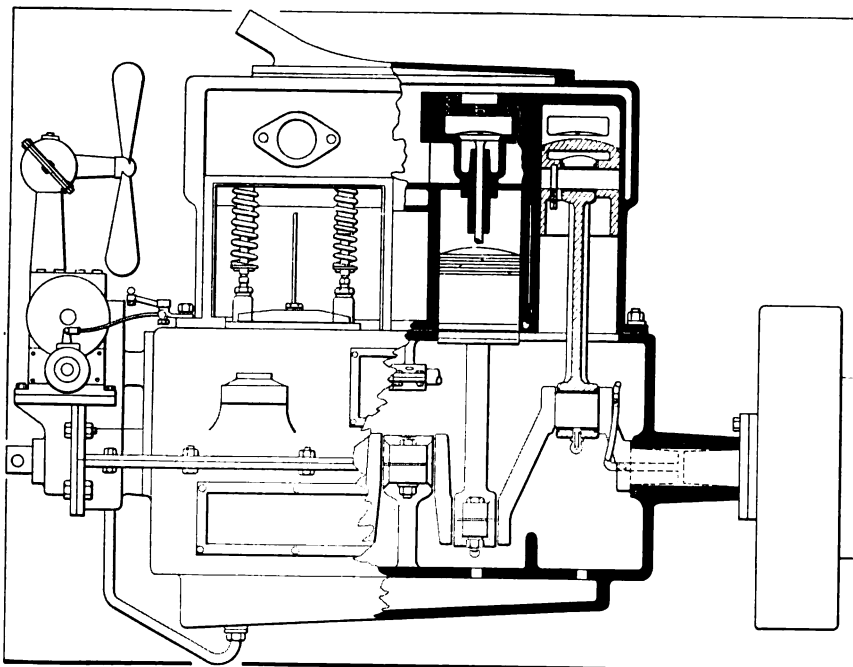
View of motor as drawn by an "Automobile" reader in illustrating his ideal car
